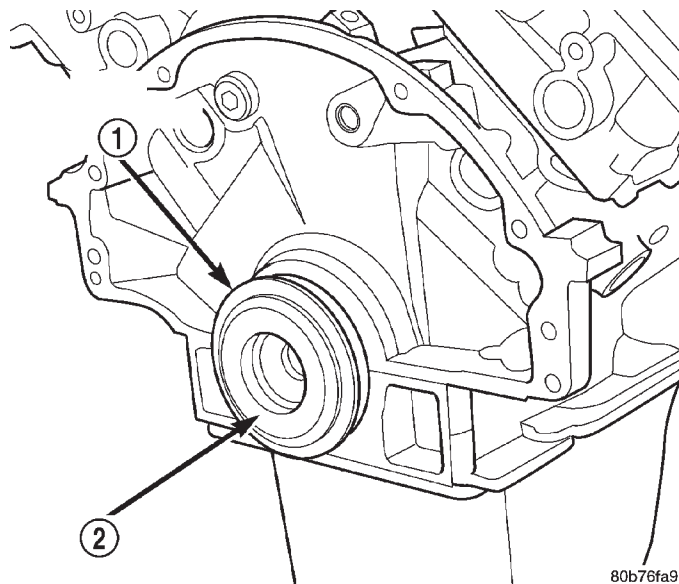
Crankshaft Rear Oil Seal Guide Special Tool 8349-2 and Oil
